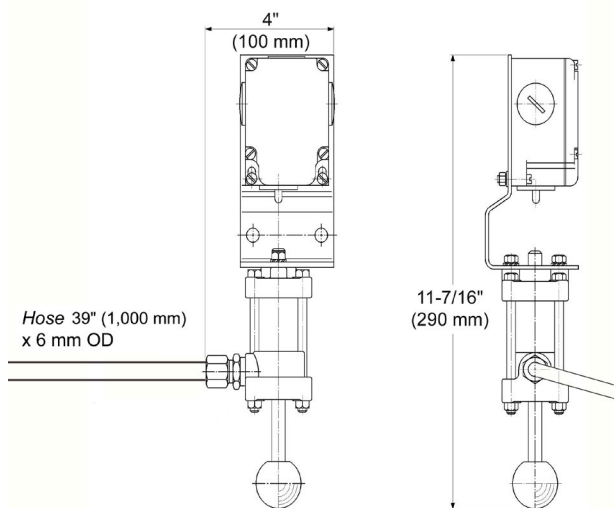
Pneumatic Discharge Pressure Switch Dimensions
